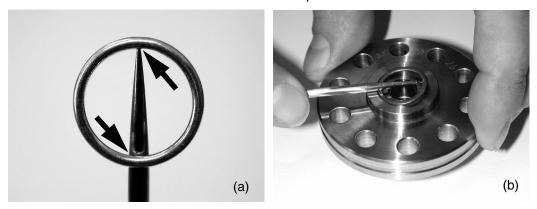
(a) Two oil-fill holes. (b) Removing the o-ring.
